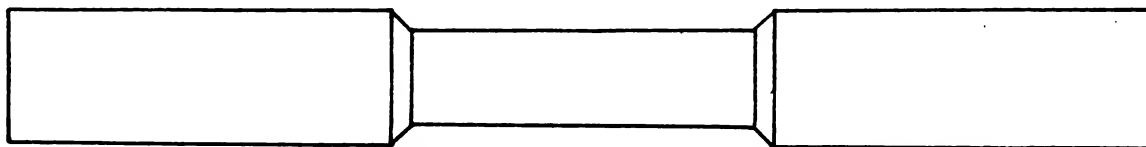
SHOWING FULL SIZED TEST SPECIMEN USED TO DETERMINE TEMPER
